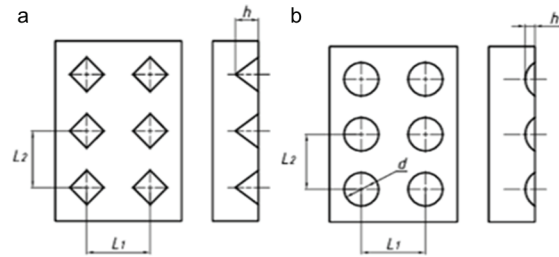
Schemes of forming discretely textured oil-retaining surfaces. Profile shape of microdimples: (a) prismatic; (b) spherical.
